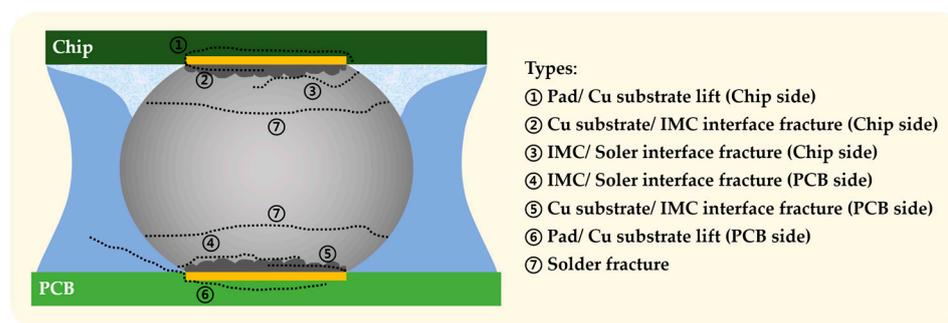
The possible crack path of solder joints from the board level drop test.
